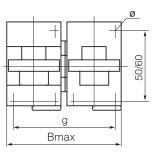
JLC2-40N~95N(Horizontal installation)
